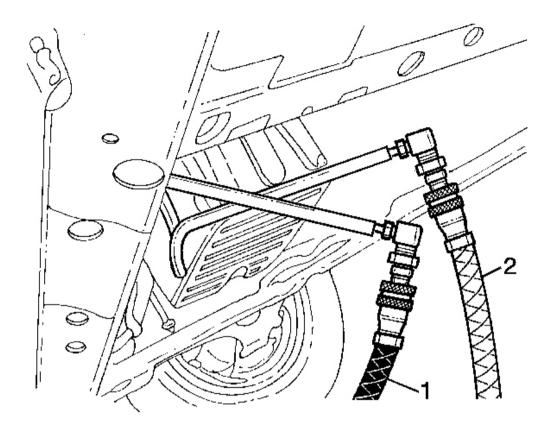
Connecting Black Supply Hose And Clear Waste Hose Courtesy of GENERAL MOTORS CORP.
